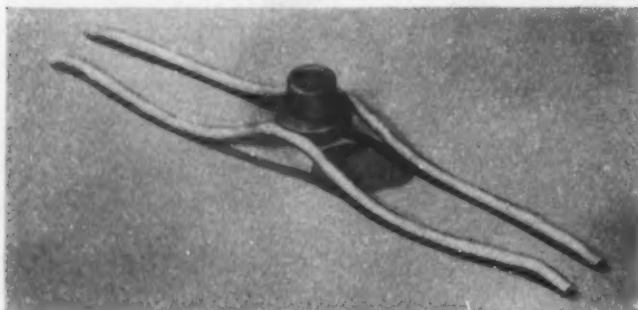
Machined collar piece and wire forms, projection welded into one unit
